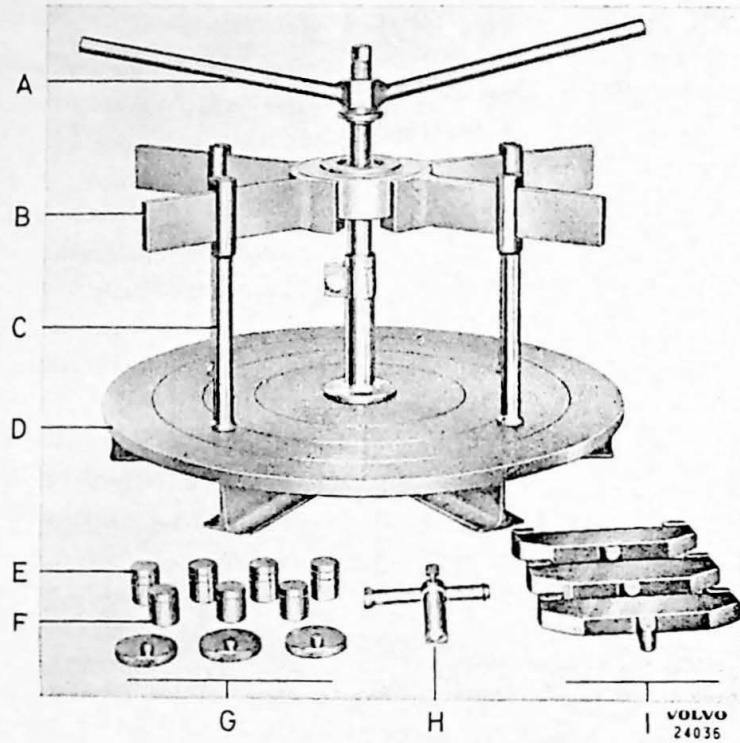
Clutch fixture SVO 2322 with accessories
